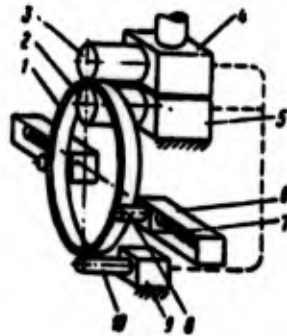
Diagram of a machine for the rolling of rings: 1 - billet; 2, 3 - rollers; 4 - bearing subassembly; 5 - fixed bearing; 6 - shoe; 7 - spring; 8 - lateral supporting rollers; 9 - command apparatus; 10 - roller.
